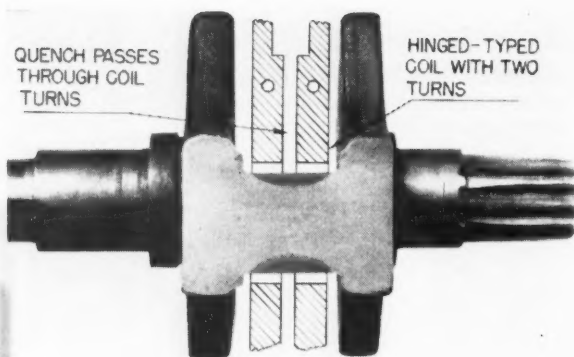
An etched section of a hardened crankshaft bearing area and a two-turn coil which is used for heating.
